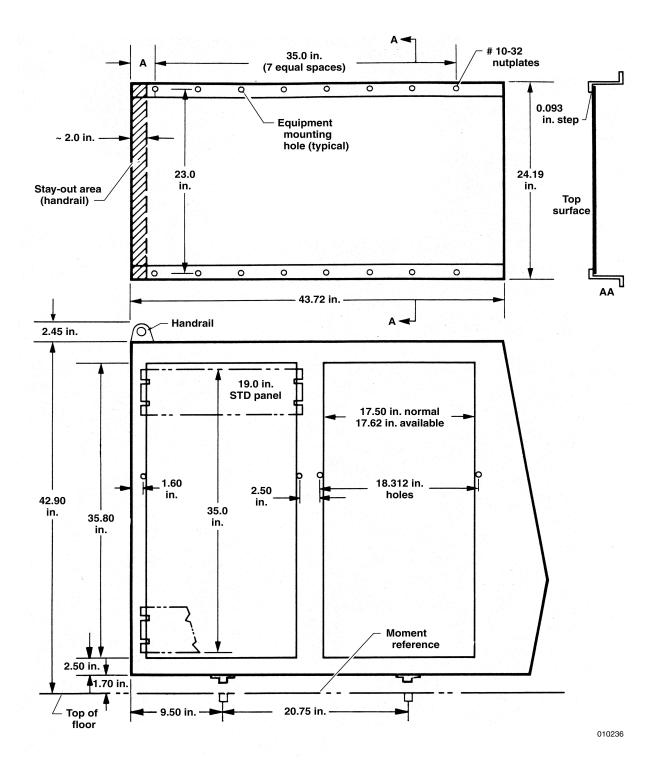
(b). Standard equipment racks – medium rack – dimensions.
